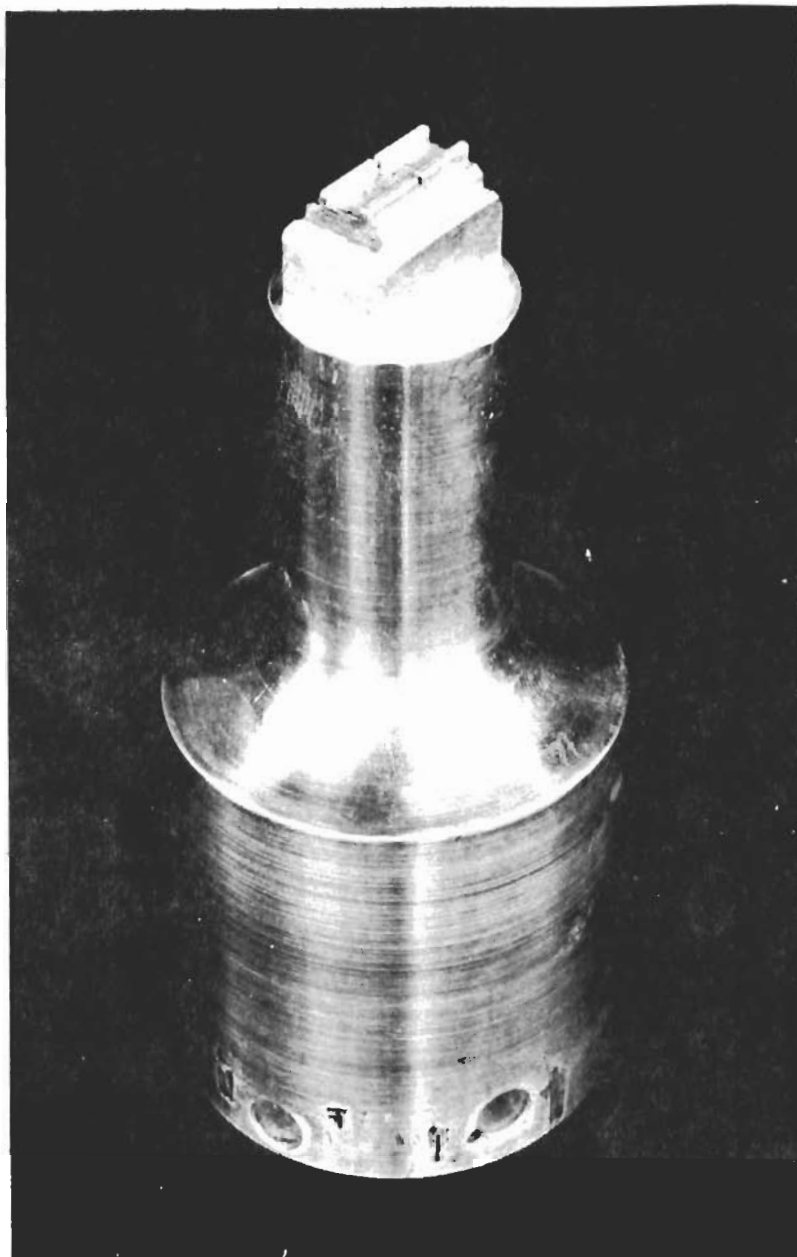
ULTRASONIC CUTTING TOOL FOR CUTTING HALL ELEMENT CONFIGURATION
